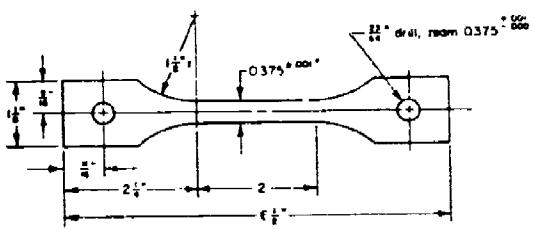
SHEET CREEP- AND STRESS-RUPTURE SPECIMEN
